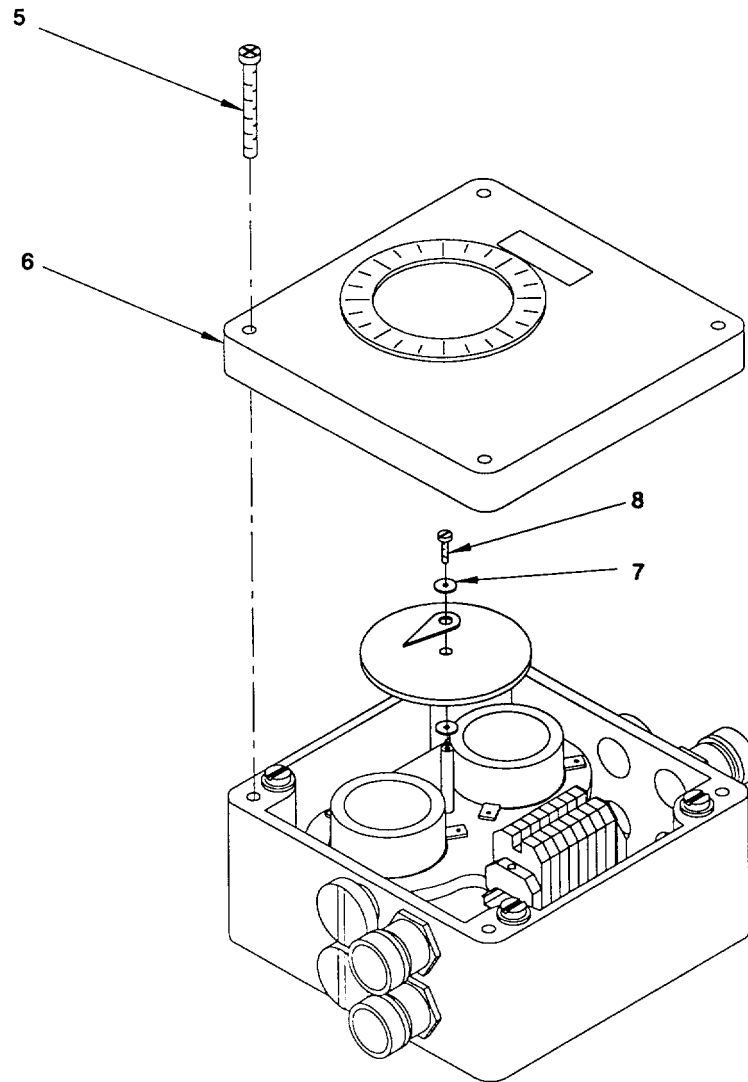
Thrust Direction Indicating Device, Middle Control Panel "A1", Remove/Install/Adjust. (Sheet 2 of 2).
